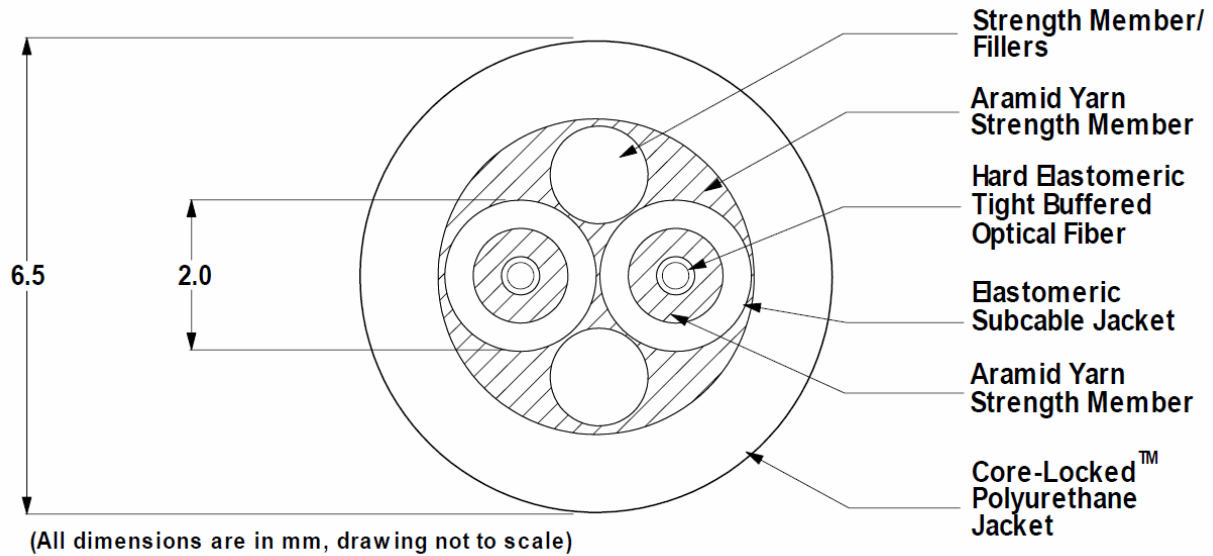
Type H26 Harsh Environment Cable used for Industrial Duplex LC Assemblies
